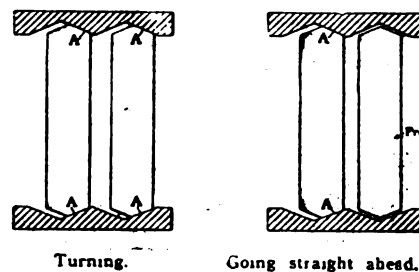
Sectional View of new Hedgeland Equaliser.
